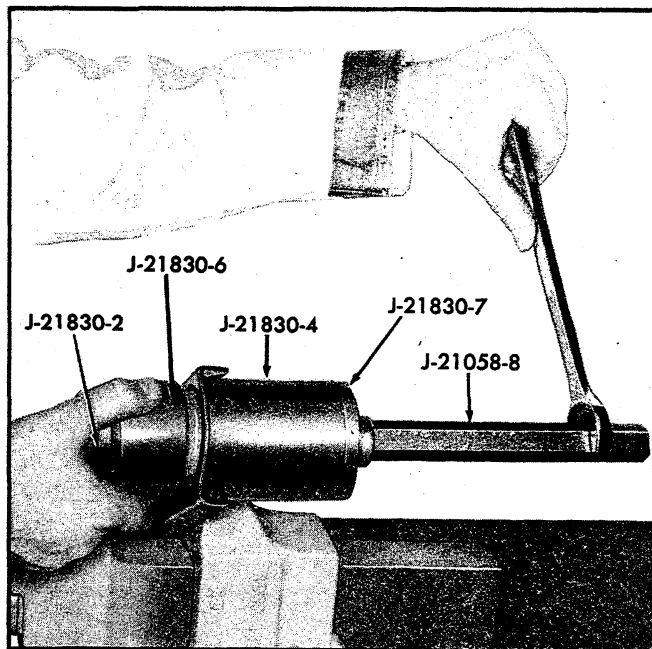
Upper Control Arm Bushing Installation (Chevrolet)
